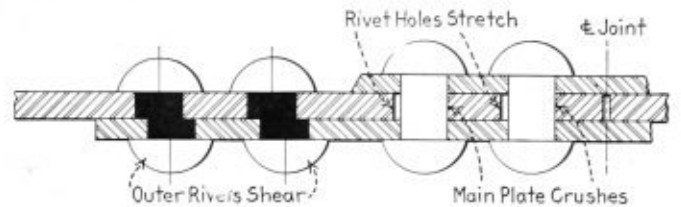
Failure of Double Butt Strap Joint Through Third Row of Rivets; Failure (T + Sh)
